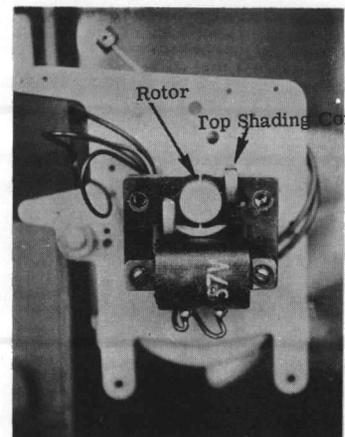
Cam Rotation (Viewed from the Front) Will Be Clockwise When Top Shading Coil of Motor is to Right of Rotor.
